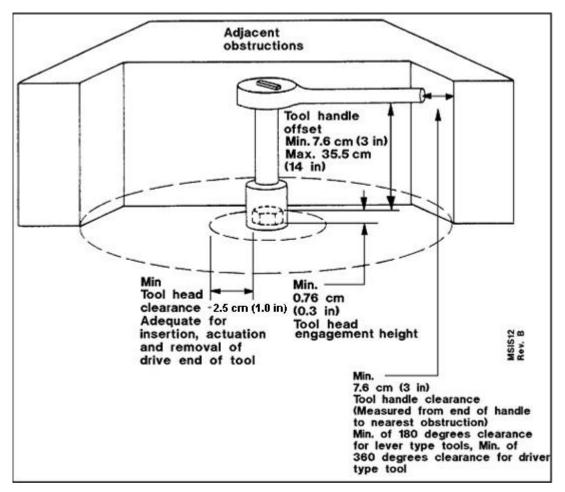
Tool access requirements. (IVA) (GIAG-3, 1986)
